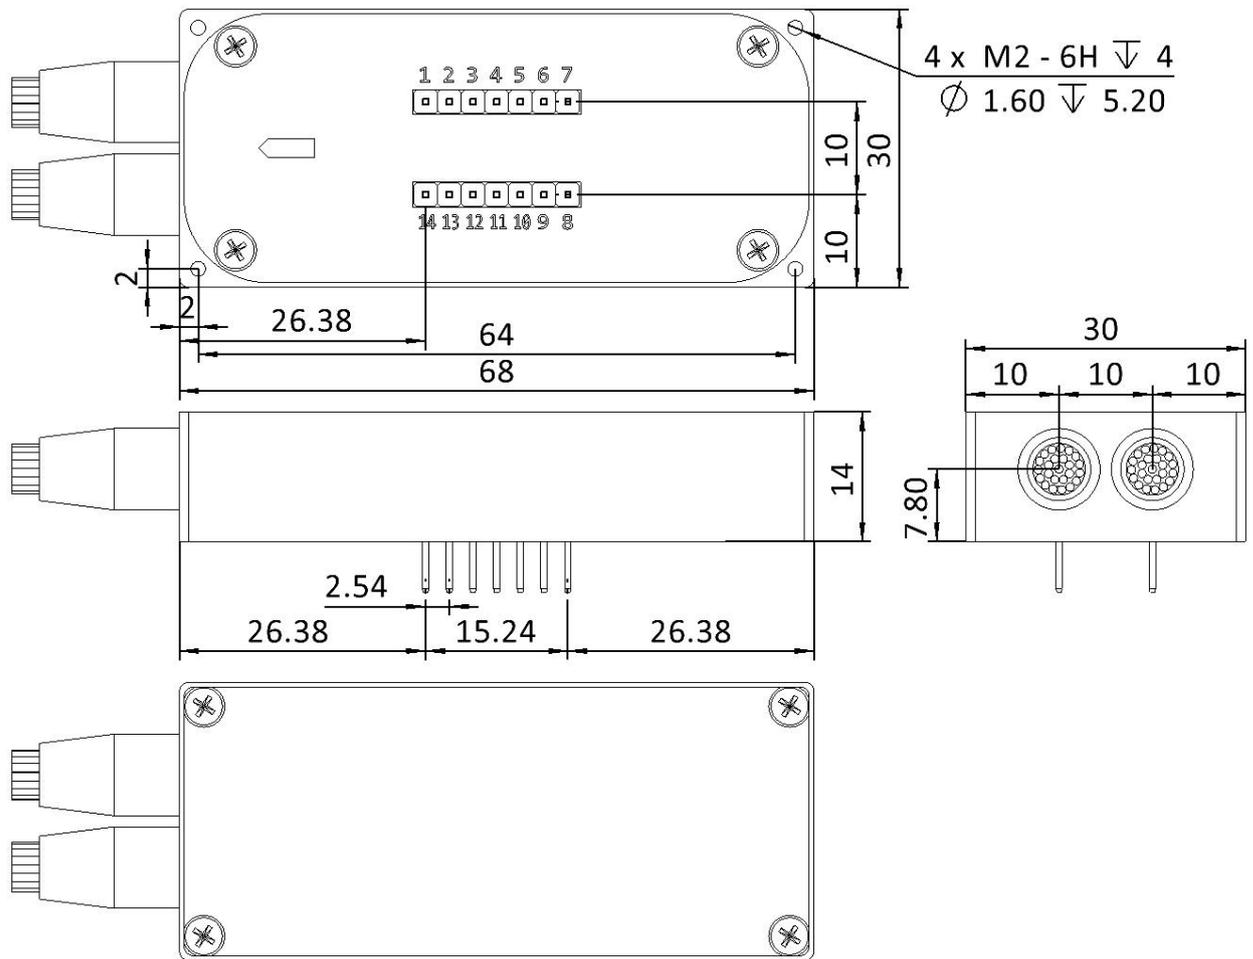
Mechanical Dimensions Drawing (16 ≤ N ≤ 24)
